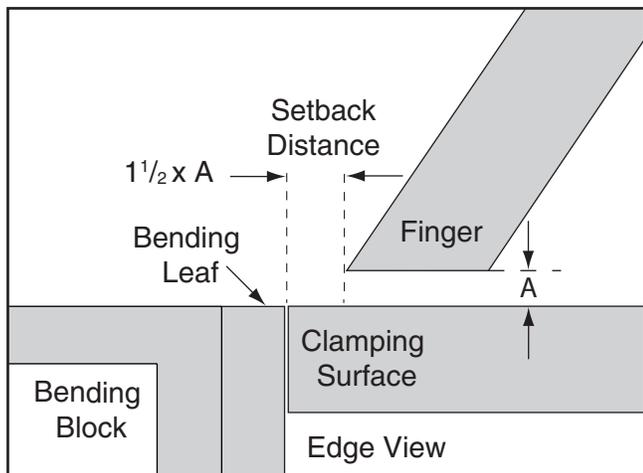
Determining setback distance for workpieces 22 gauge and thinner.
